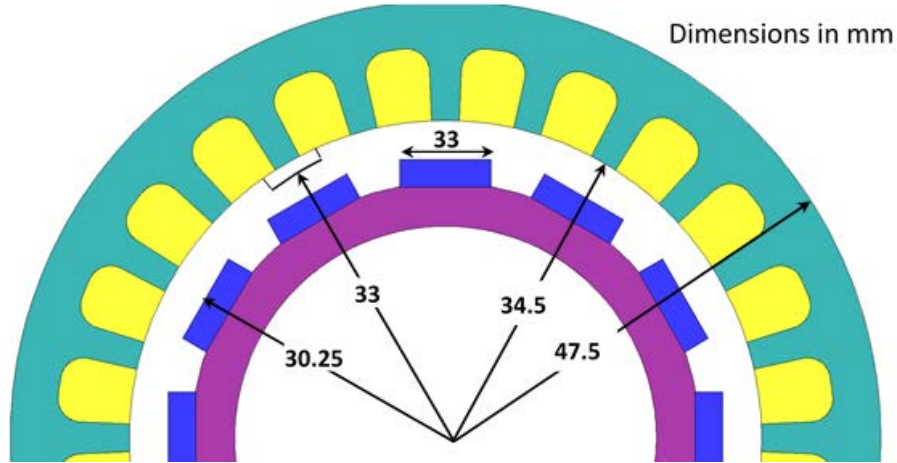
Major dimensions of the selected open-end generator for prototype fabrication.
